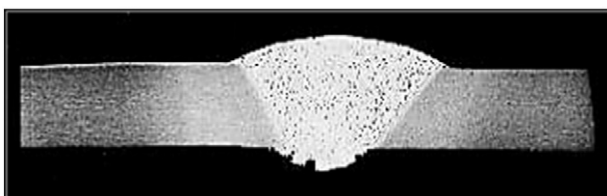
Trapped porosity in a fusion weld [25].
